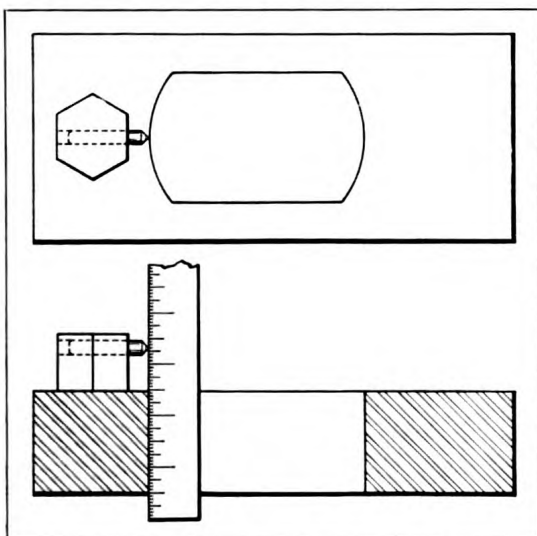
Use of straightedge to determine diamond position preparatory to dressing radius on face of wheel.
